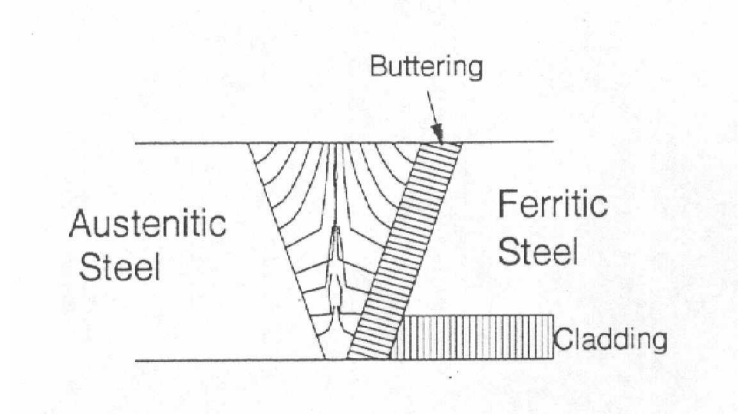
A typical configuration for a dissimilar-metal weld (see Figure 12)
